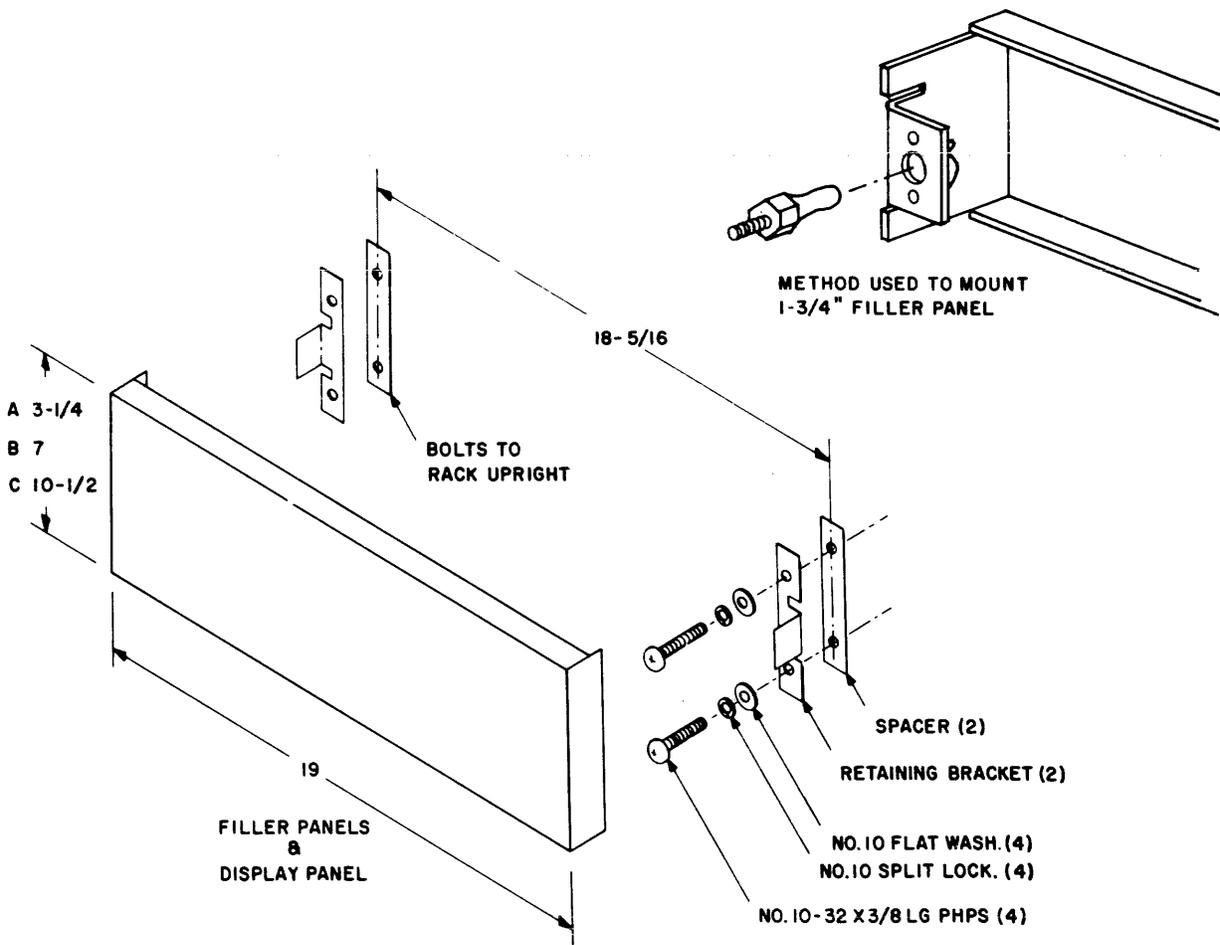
Typical Mounting Configuration for Display and Filler Panels
